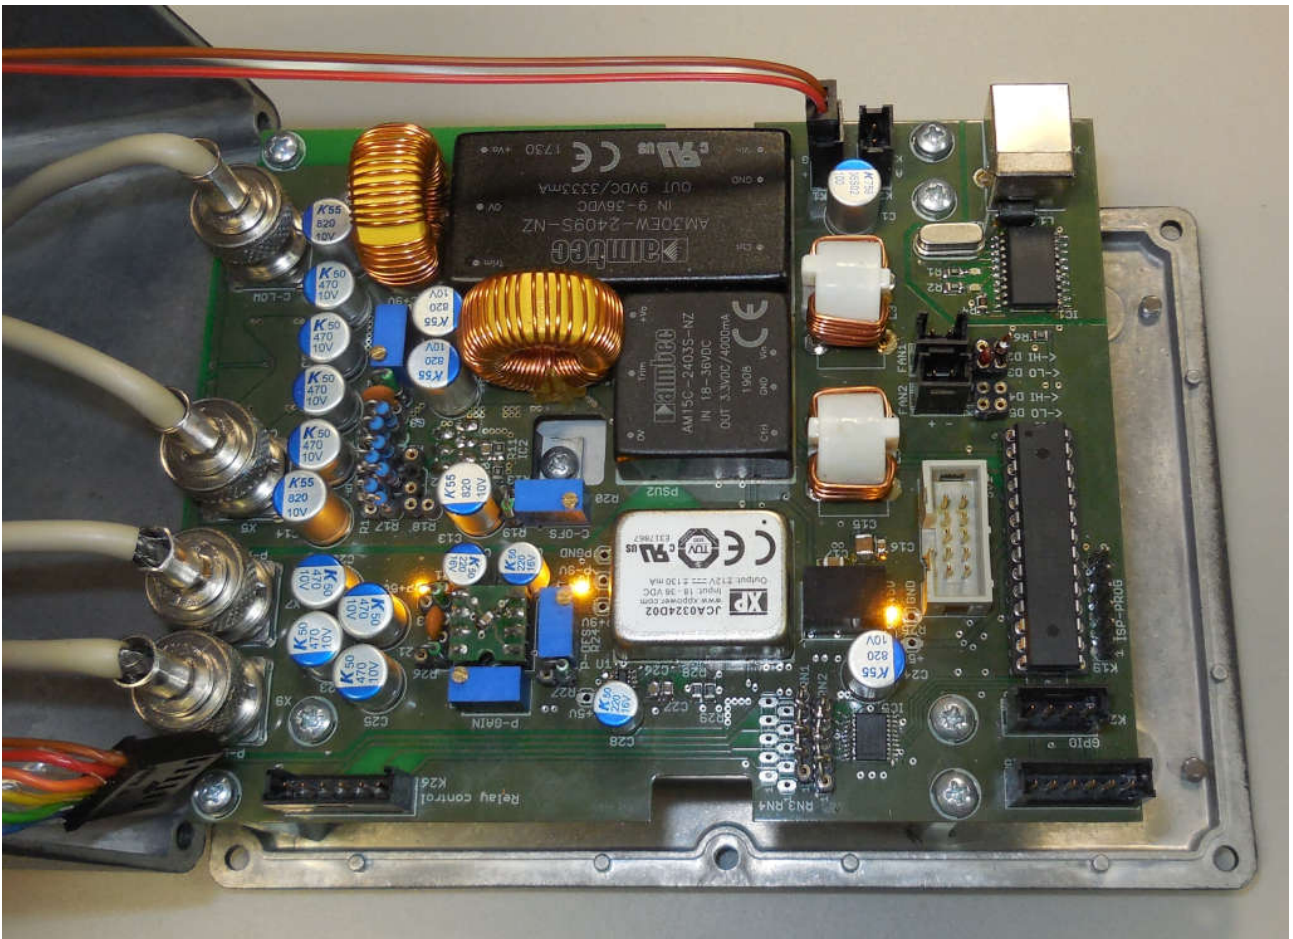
Dual DC bias source main PCB. Note the power opamp OPA548 mounted from bottom side of PCB to the heatsink.
